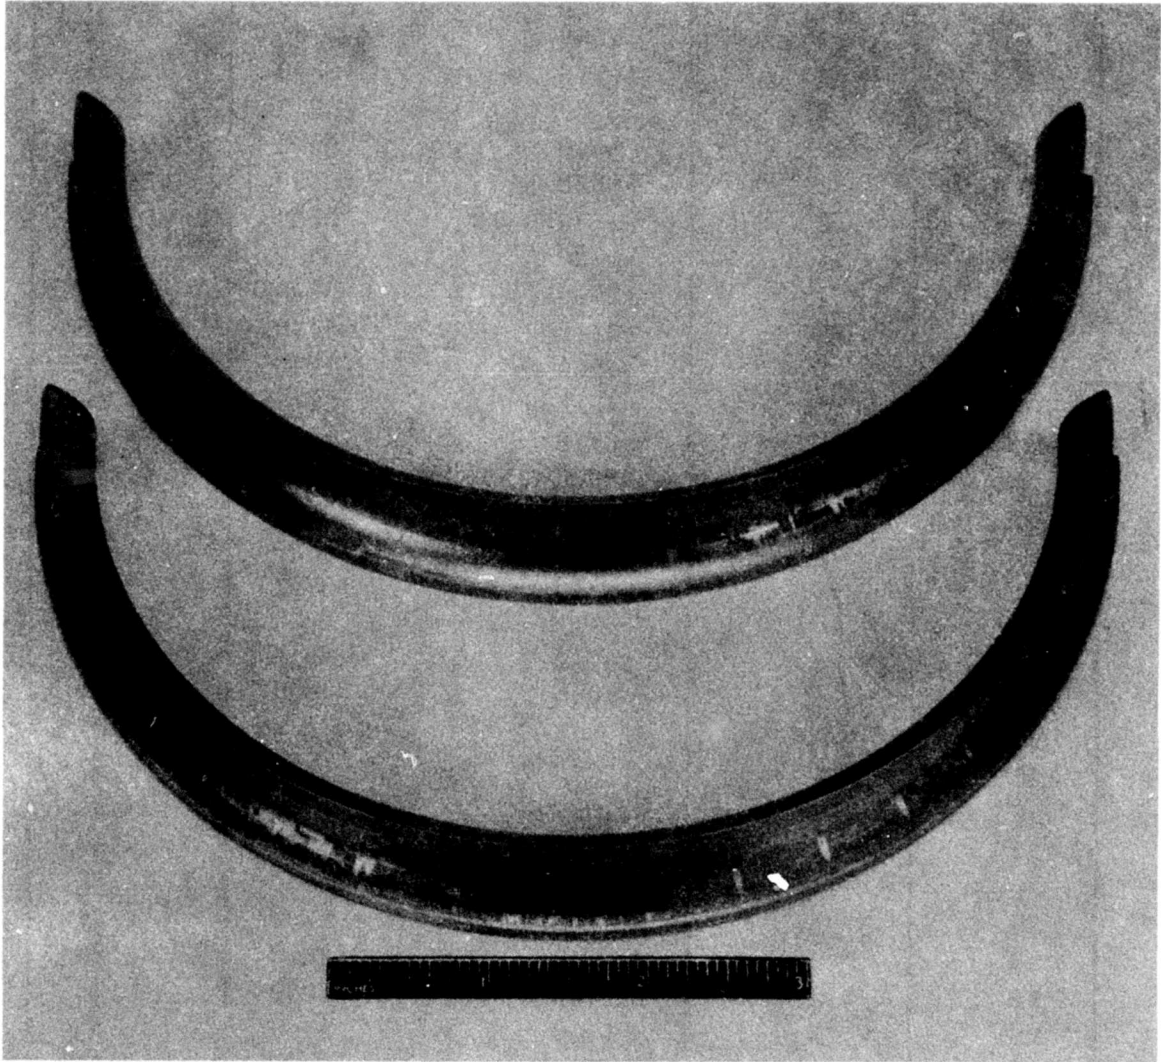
GOTHIC-ARCH INNER BEARING RACE INSERT LOADING PATTERN
